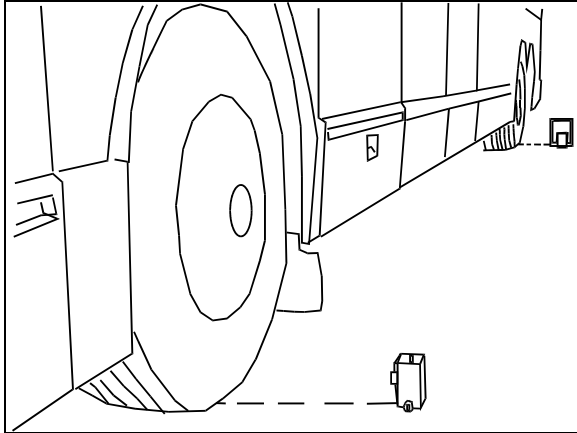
INSTALLING CALIBRATION FIXTURES 06497
